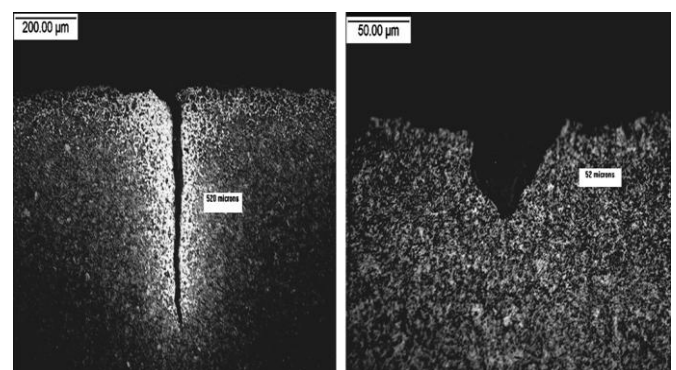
Inherited from raw material (left) and surface imperfection due to manufacturing (right)
